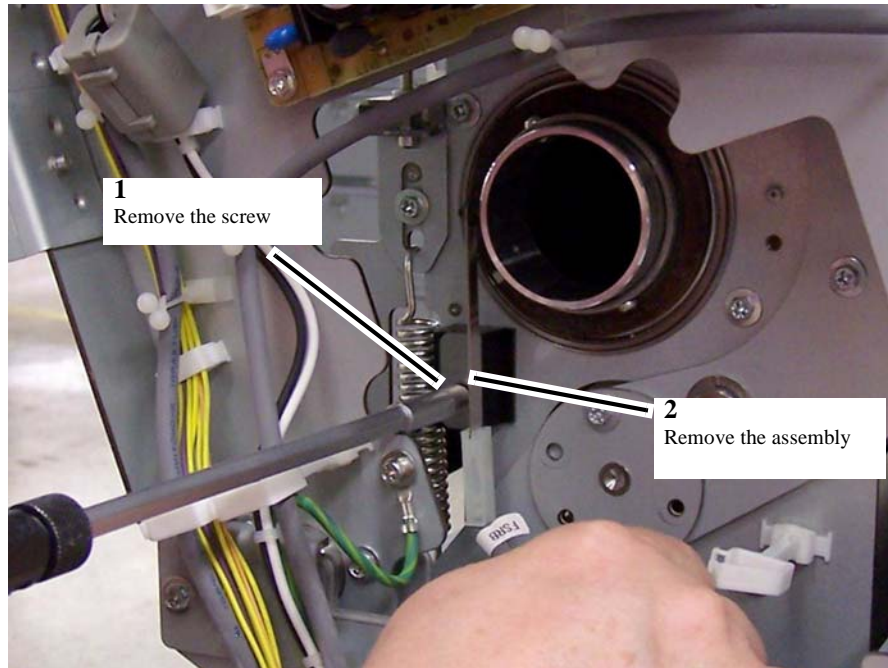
Removing the Fuser Bias Contact Plate Assembly
